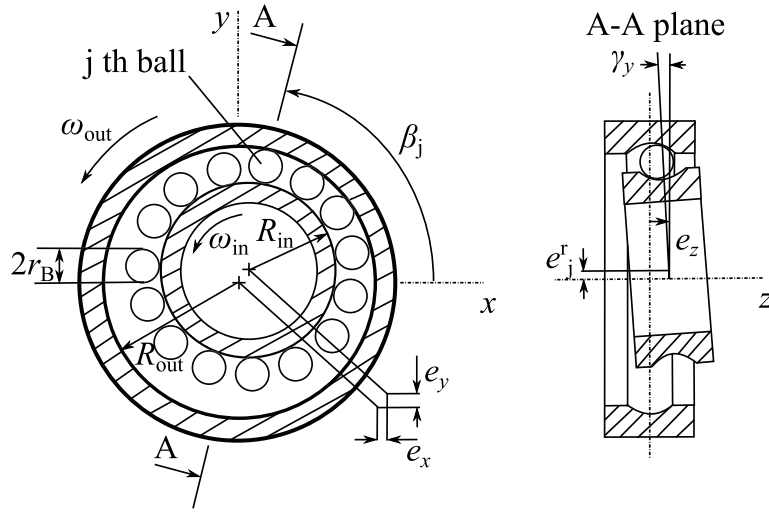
Axial and transverse cross-section in the A-A plane of illustrative structure of a ball bearing.
